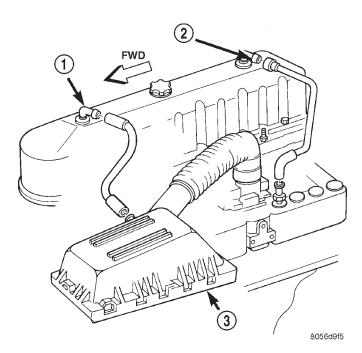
Install Orifice Tool 4.0L 6-Cylinder Engine
